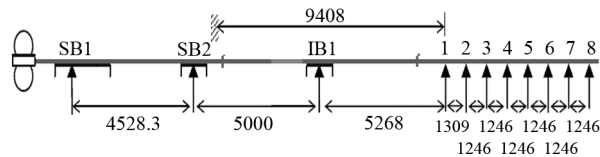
Shafting alignment of 176,000 DWT bulk carrier
